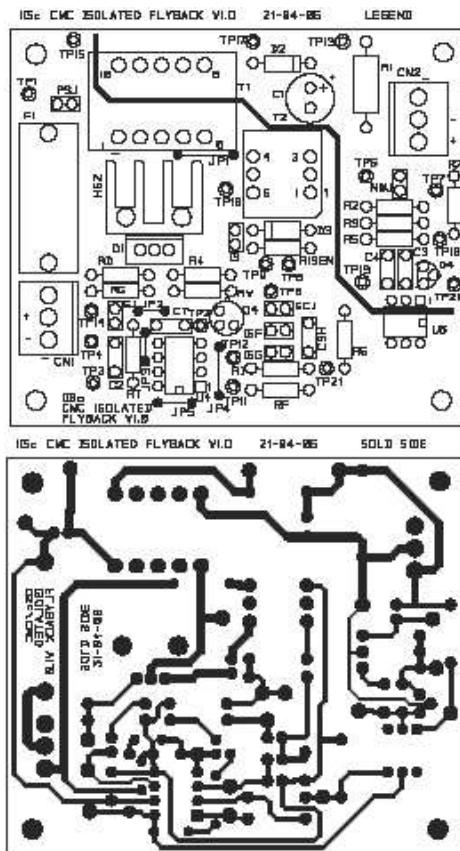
Solder and Component Side of Isolated Flyback Converter
